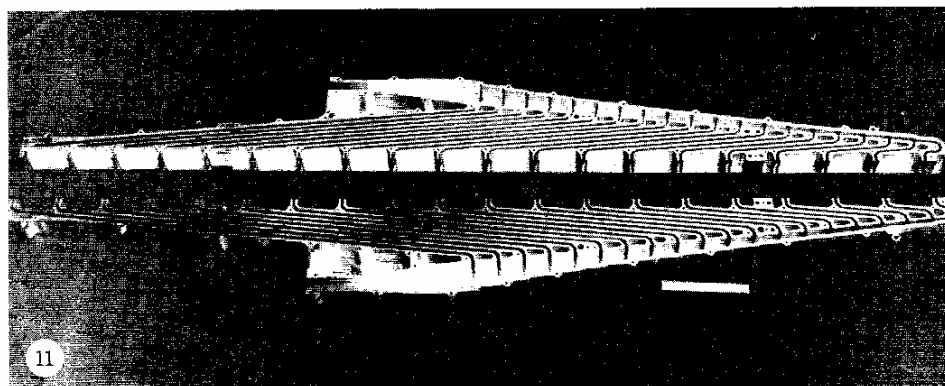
Fully machined module which is produced by a numerically controlled machine.
